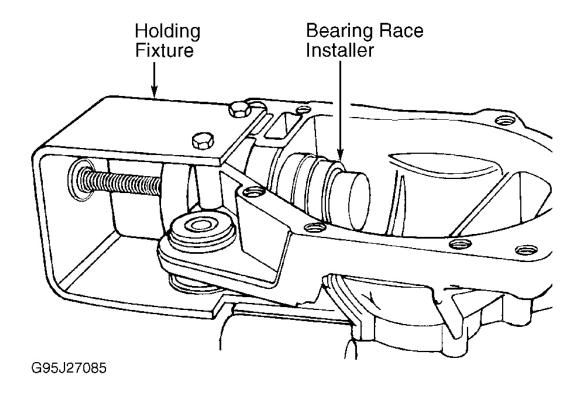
Installing Inner Pinion Bearing Race Courtesy of GENERAL MOTORS CORP.
